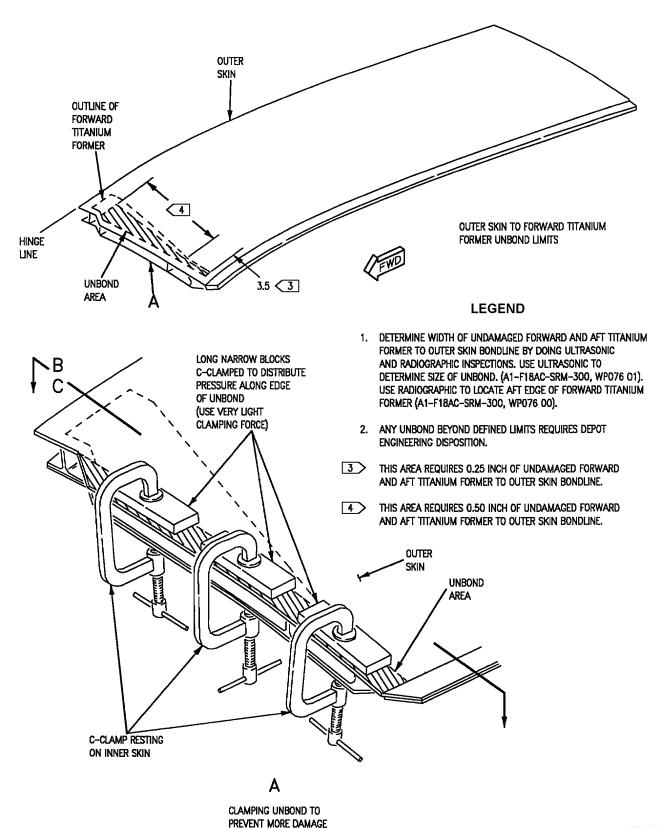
Main Landing Gear Outboard Door Leading Edge Outer Skin Repair (Sheet 1)
